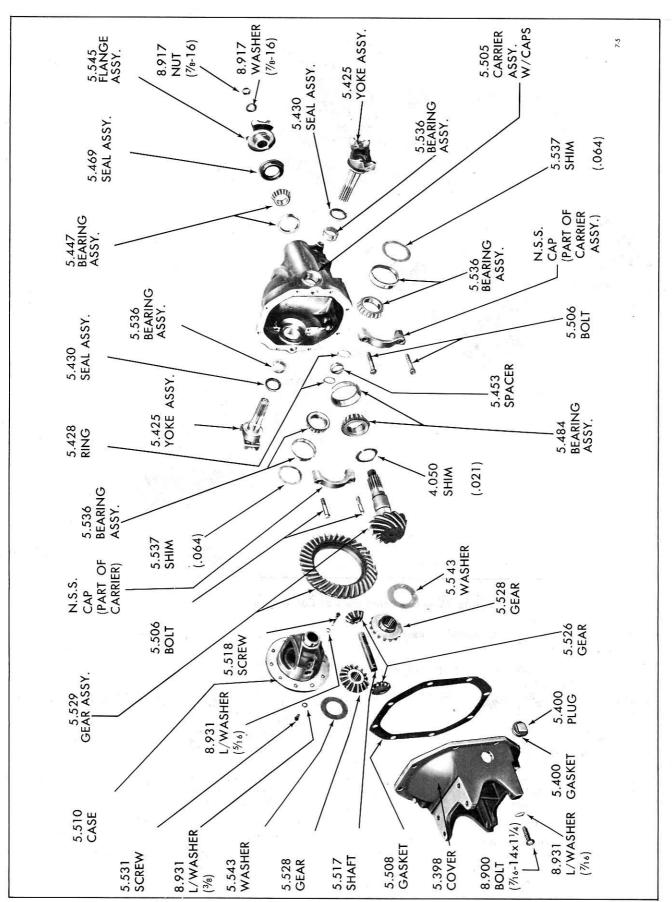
Corvette Rear Axle Carrier Assembly — Exploded.
